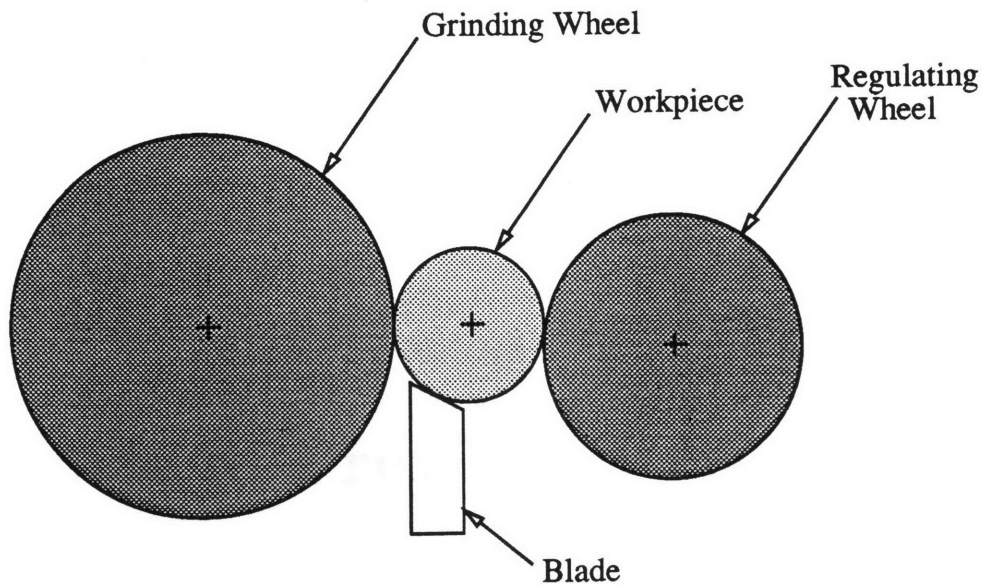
Centerless Grinding with the workpiece held at 3 contact points.
